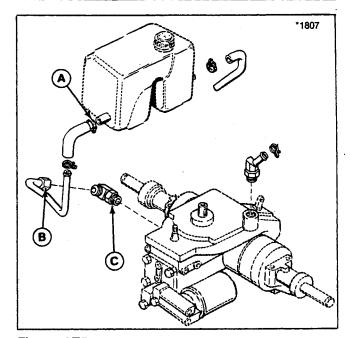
B. A. Inlet Tube B. Fitting C. 90° Elbow
